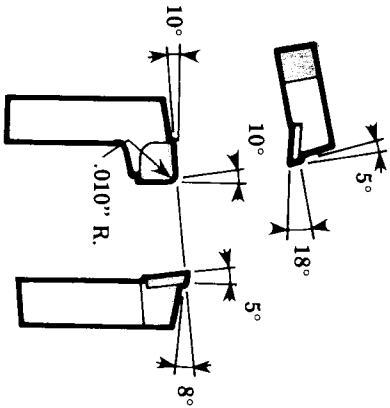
Typical carbide insert cutter bit for inserted type finish face milling cutter.
